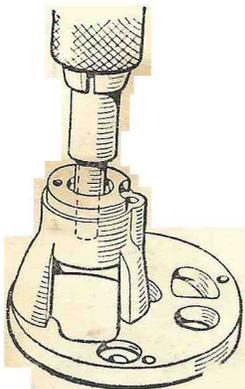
Commutator End Bracket with Bearing Bush.
